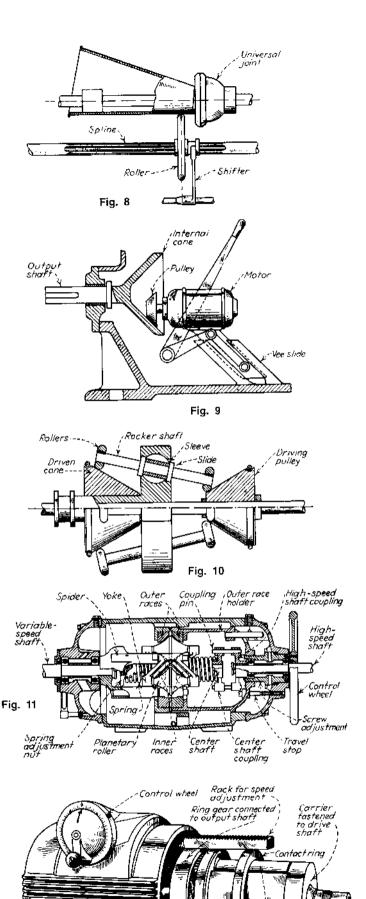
The main component of this drive is a hollow internal cone driven by a conical pulley on the motor shaft. Its speed ratio can be changed by sliding the motor and pulley up or down in the vee slide. When the conical pulley on the motor shaft is moved to the center of the driving cone, the motor and cone run at the same speed. This feature makes the system attractive in applications where heavy torque requirements are met at the motor's rated speed and it is useful to have lower speeds for light preliminary operations.
